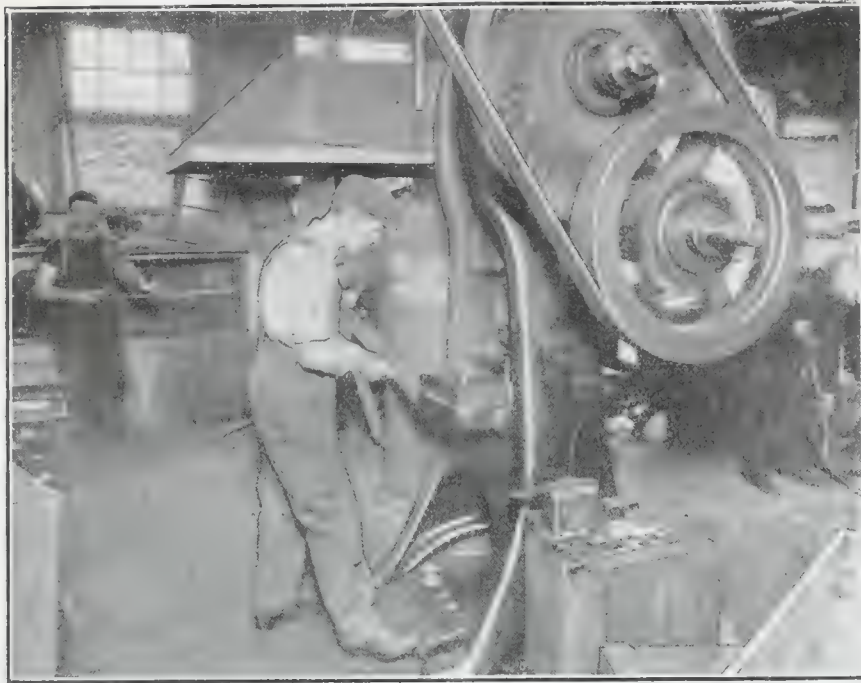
LOWER PRESS FORGING SLUGS INTO FUSE SOCKETS AND PLUGS
